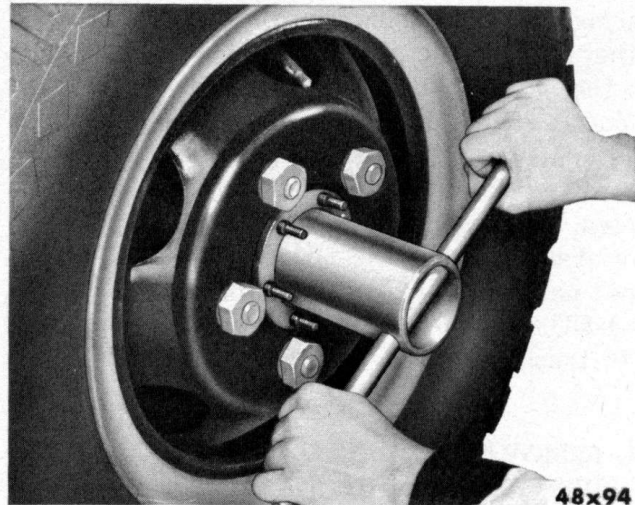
Removing Rear Wheel Bearing Adjusting Nut (Tool DD-824)
